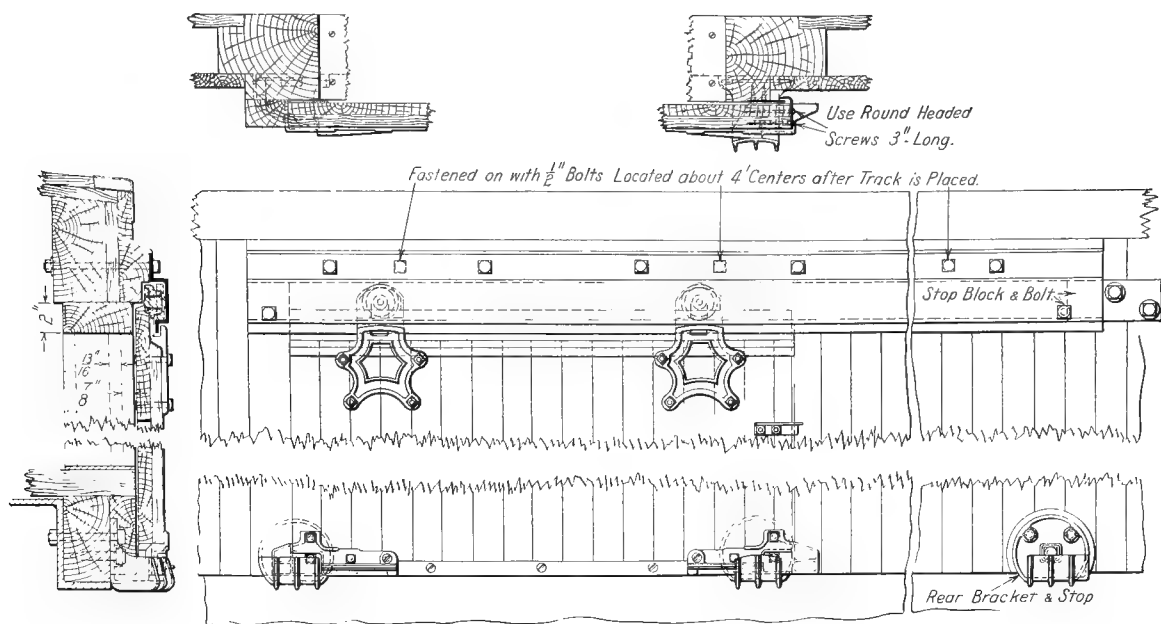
Chicago Car Door and Fixtures. Chicago Car Door Company
